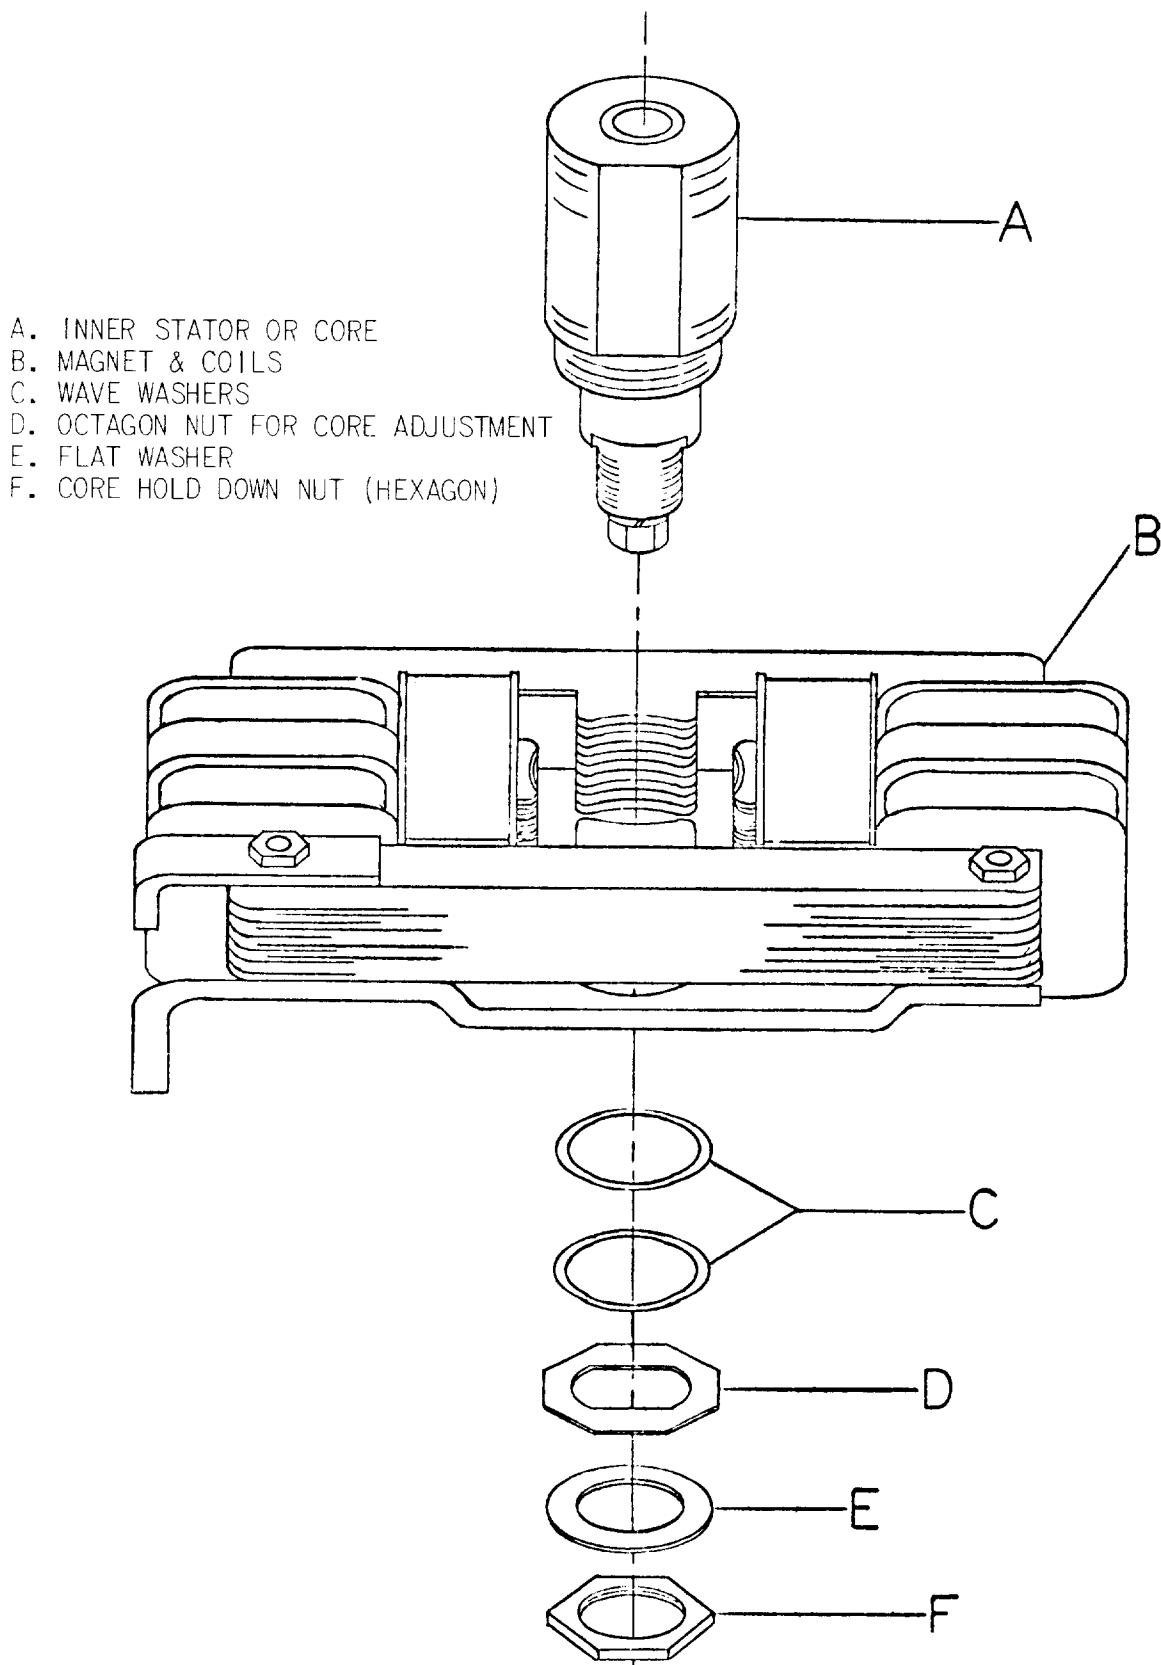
(0208A3583-0) Assembly Of Core And Associated Parts
